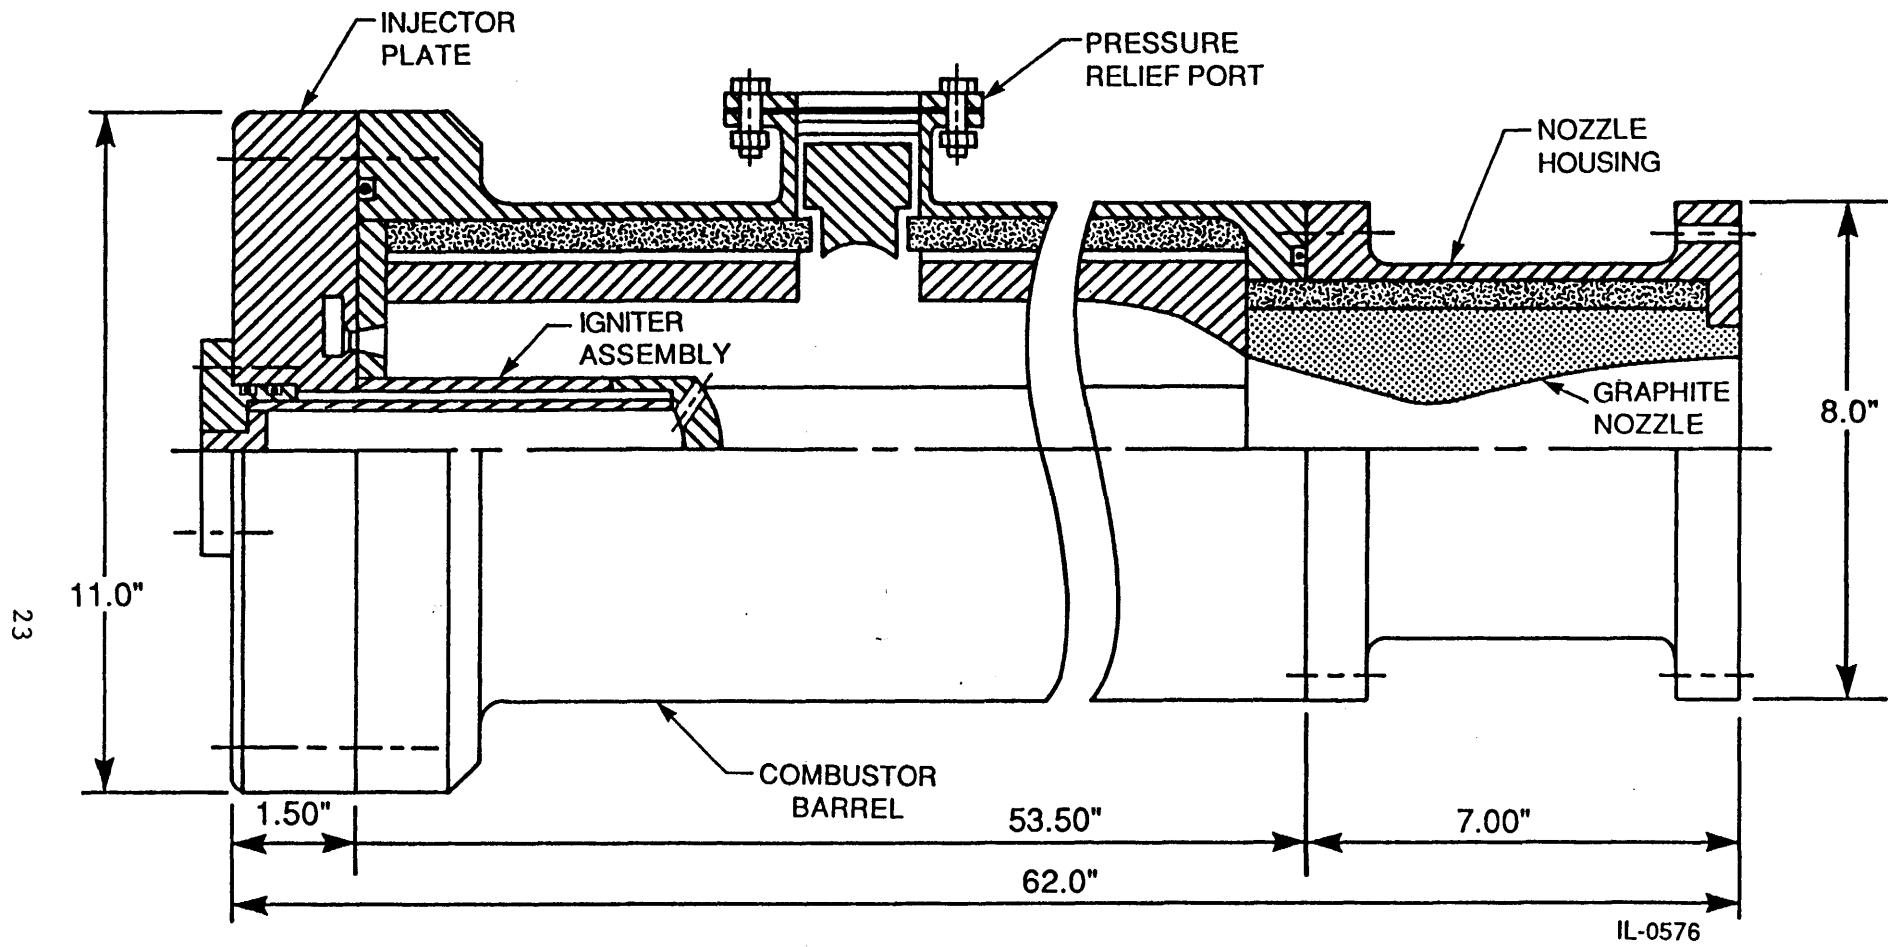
Preliminary Assembly Drawing of the Hybrid Combustor.
